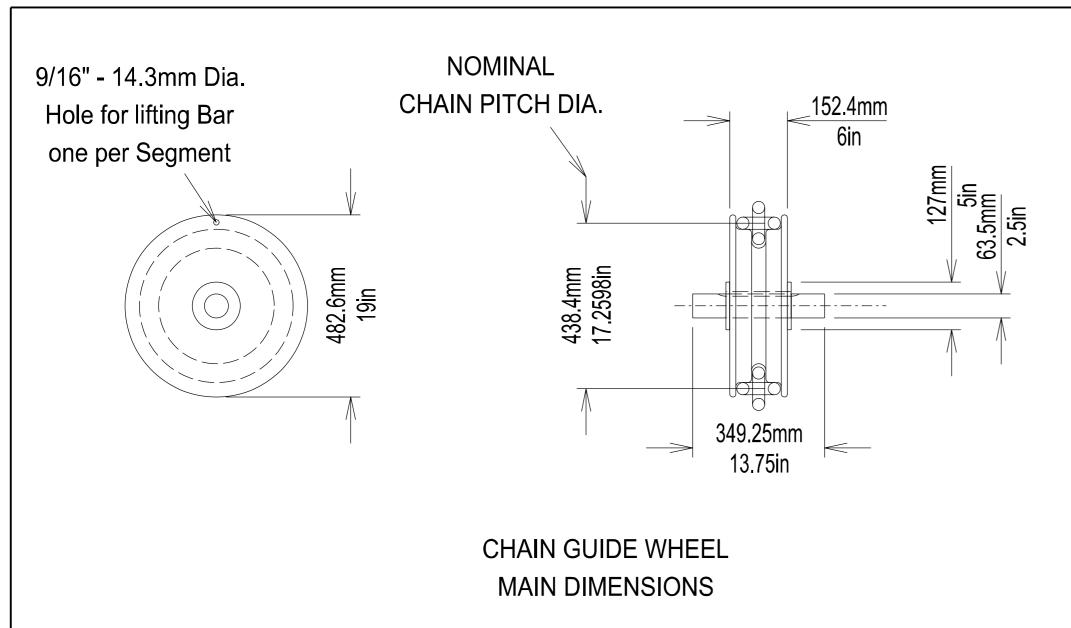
/02/201 Rev 0, Sheet 1 - Chain Drive Wheel Segments
